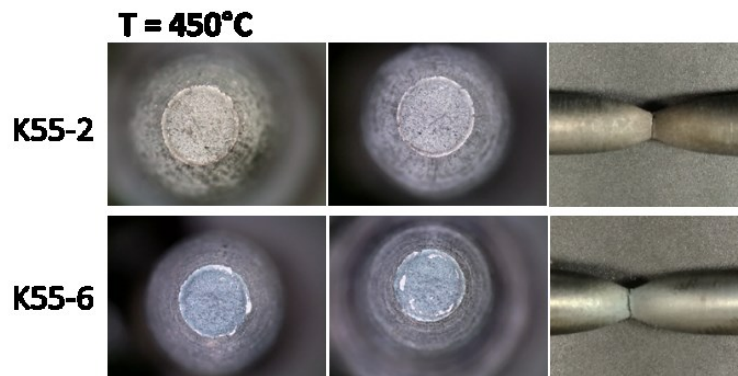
Fracture surfaces and necking profile for experiments K55-2 and K55-6 both tested at 450°C.
